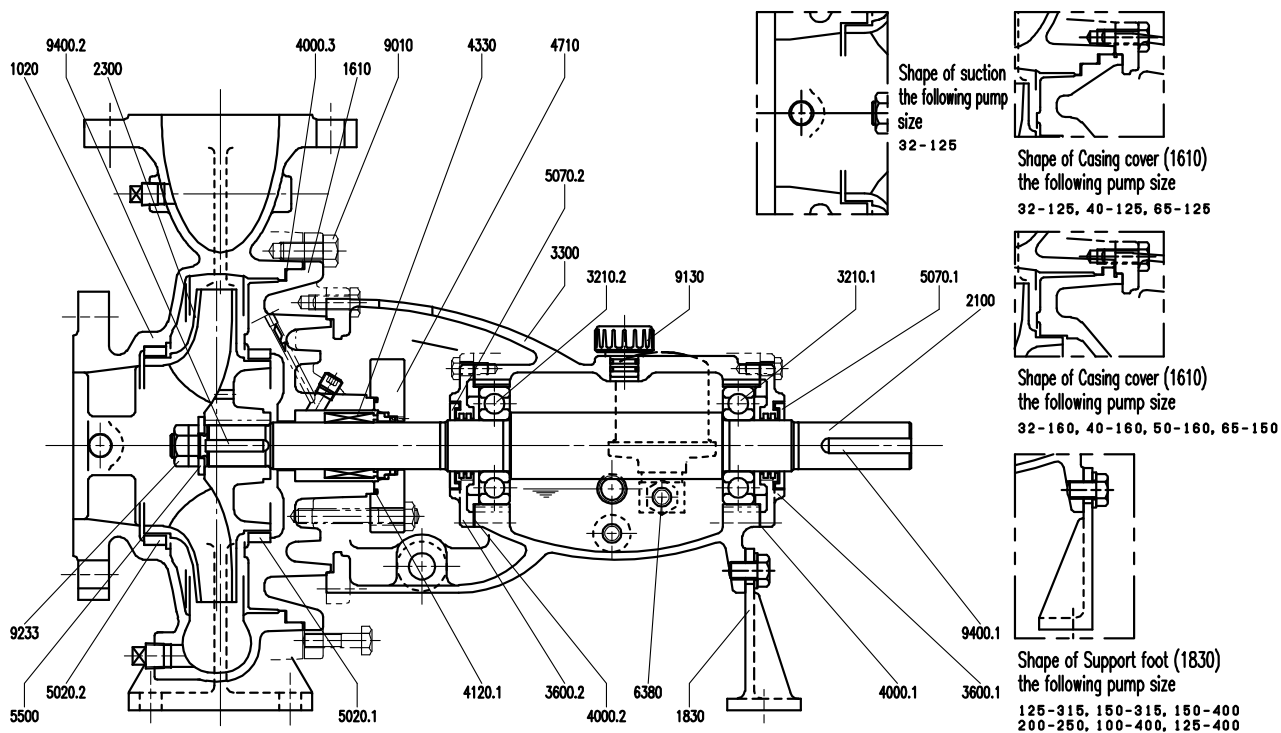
Sectional Drawing (mechanical seal type is "CA", oil lubrication with round oil gauge)
